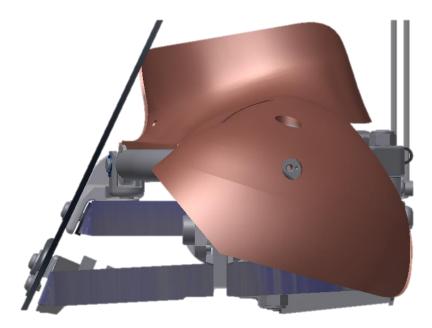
Indent Position Measurement, M4 Thread Access thru Lateral Hole in Shoulder Cover
